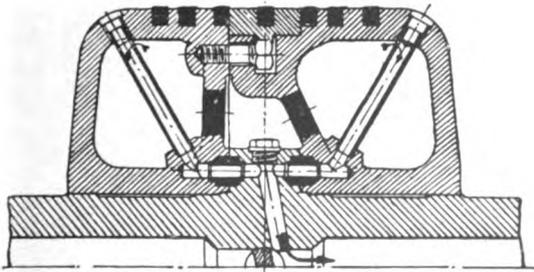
Schüchtermann Piston and Rod Coupling.
